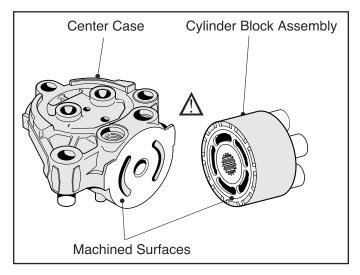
, Center Case and Cylinder Block, Machined Surfaces
